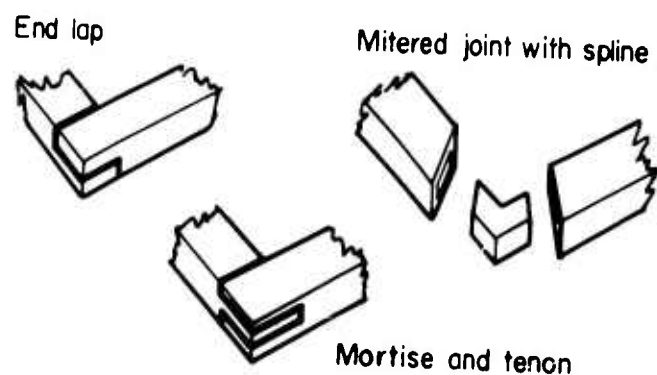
SOME DESIGNS FOR CORNER JOINTS (Ref. 27)
